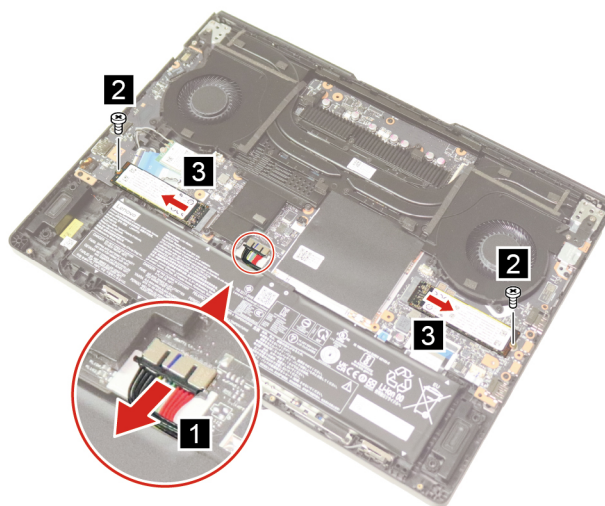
Disconnect the battery pack cable, remove two screws, and remove the 2280 solid-state drives
